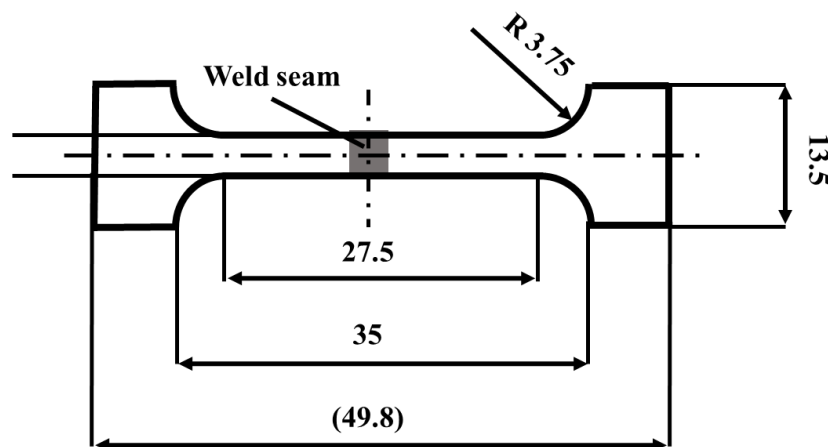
Technical drawing of utilized tensile sample. Specimen dimensions are in (mm).
